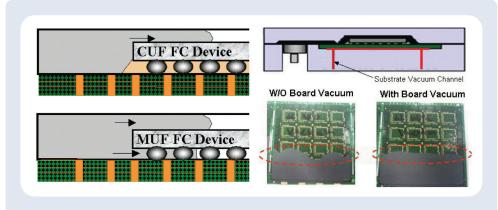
Left: Transfer Molding Encapsulation of assembled FC on IC substrate Right: Impact of vacuum usage in mold cavity on mold flow front [5].
